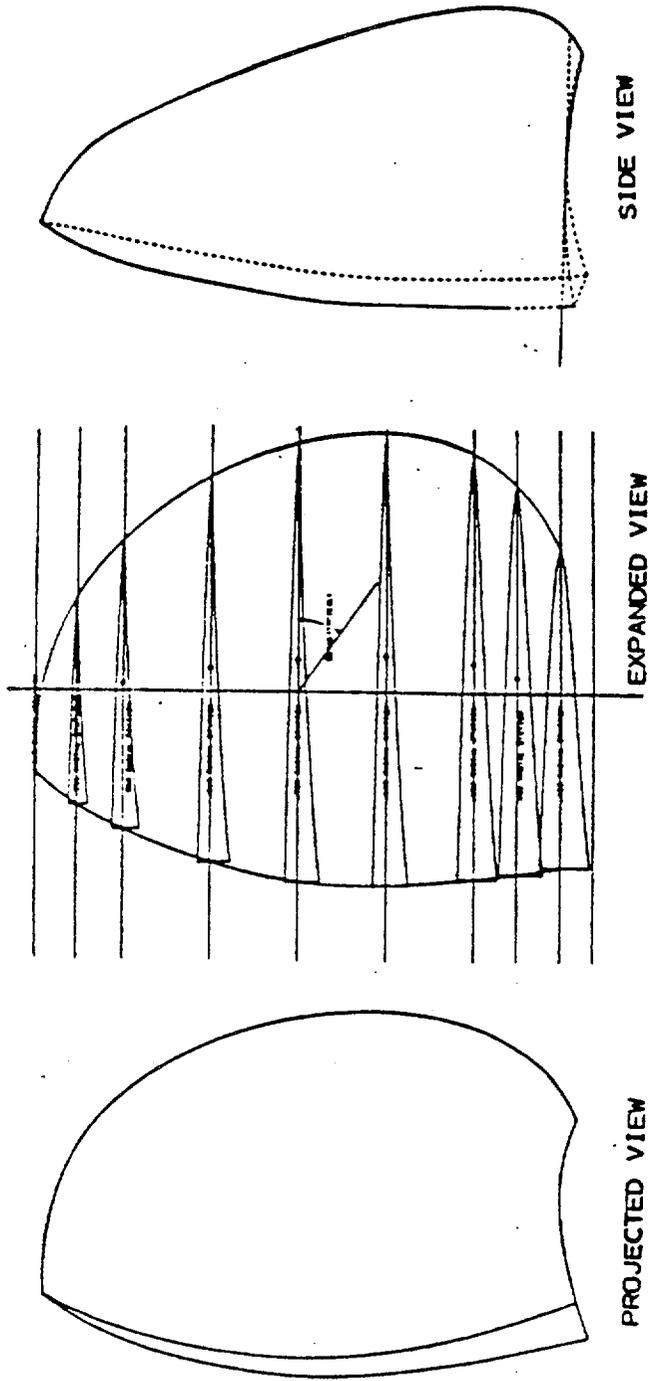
PROPELLER BLADE SECTIONS EXPANDED VIEW
